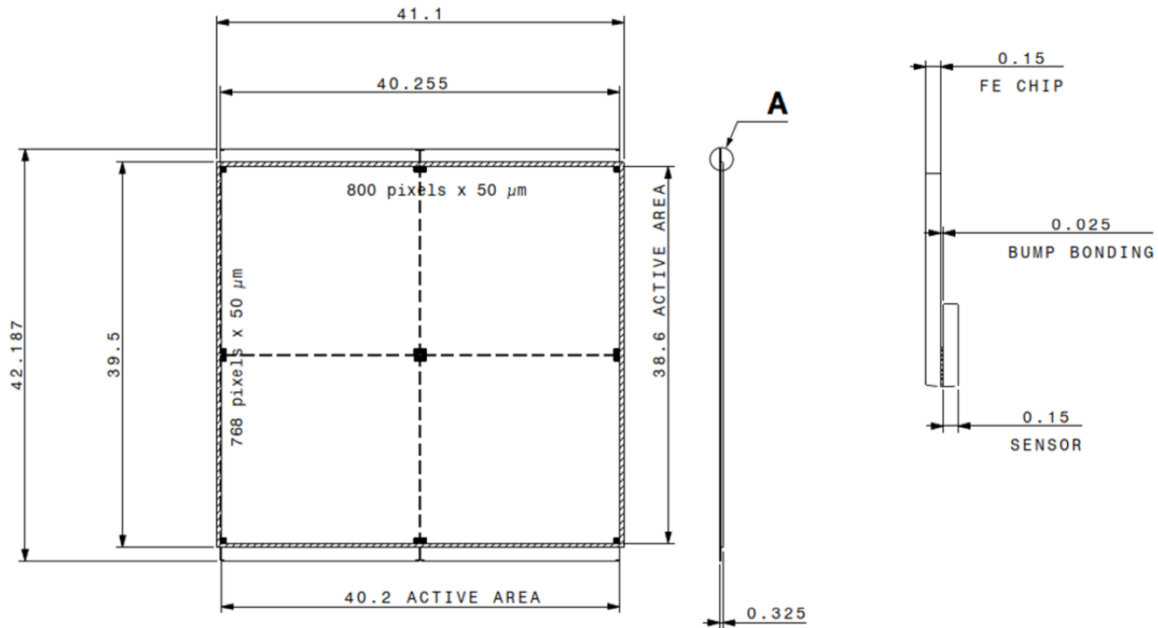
CAD view of the bare module used in the Pixel Outer Barrel (all the dimensions are in mm).
